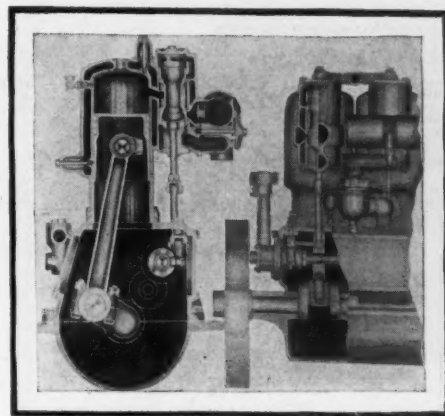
MONAHAN PISTON-VALVE ENGINE
